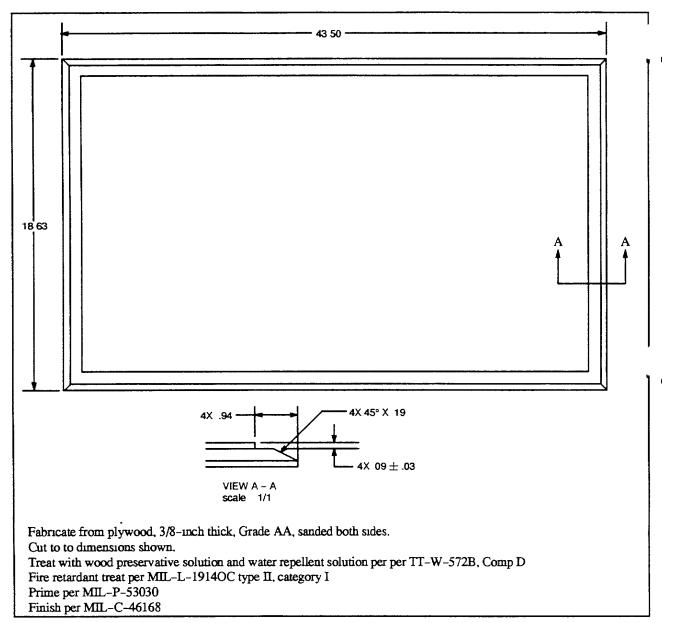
Cover Assembly Fueling Manifold, Panel Top
